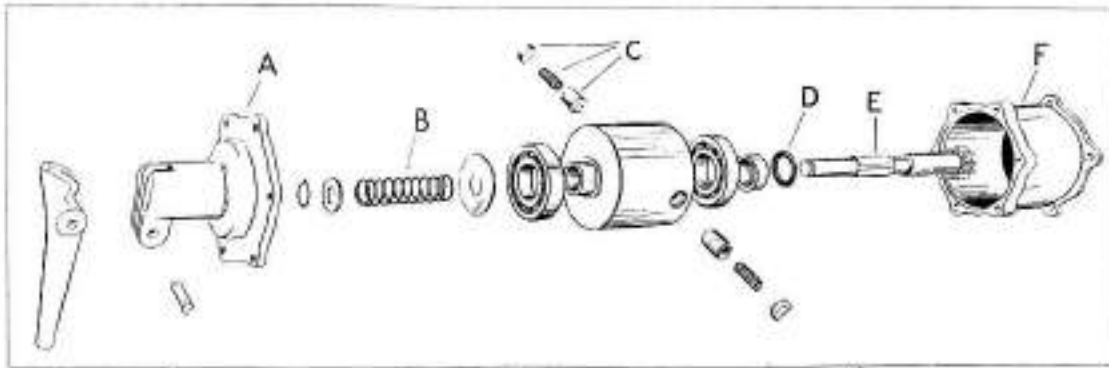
EXPLODED VIEW OF INERTIA STARTER
